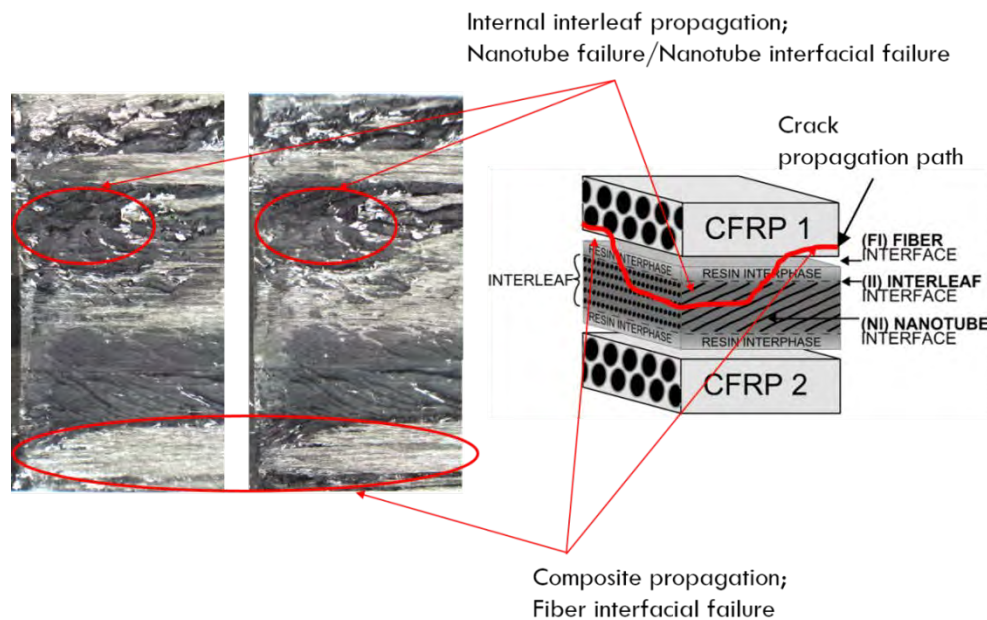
Fracture surface of representative ‘N’ specimen with schematic of typical crack path based on fracture surface characteristics.
